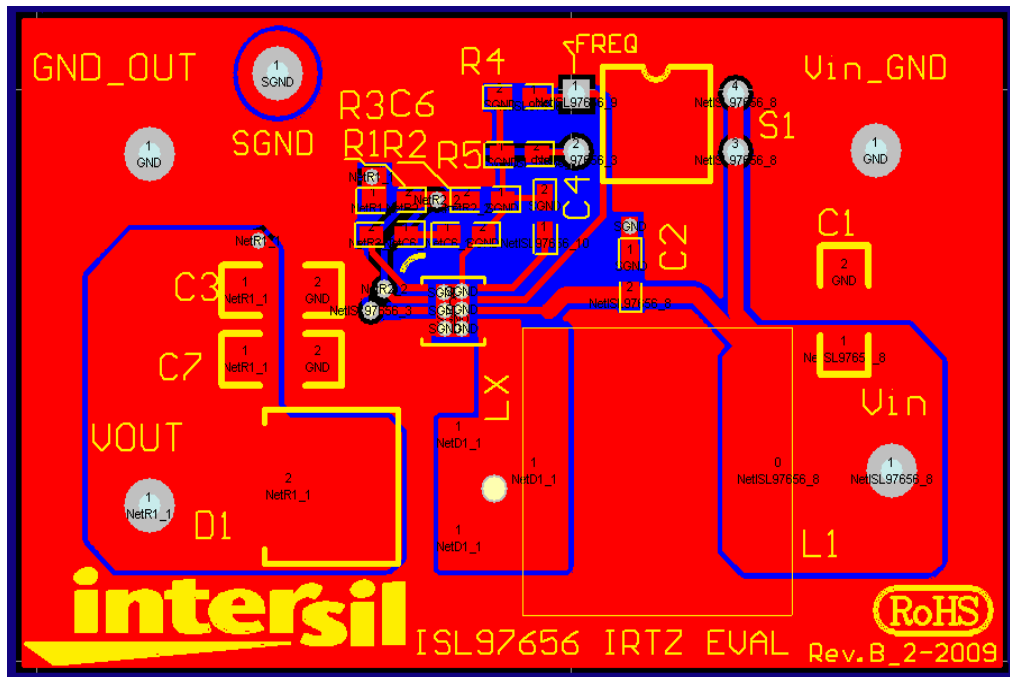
EVALUATION BOARD ASSEMBLY LAYER
